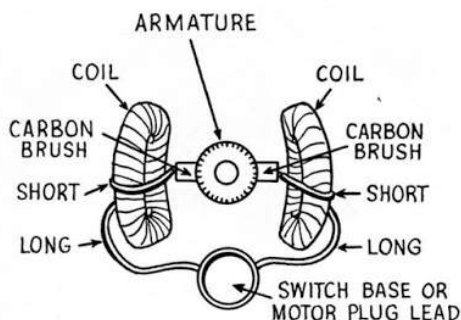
Field coil wiring diagram for single speed cleaners without dirt finders, such as Models 102-105-425-541-543-575 and early 700-725
